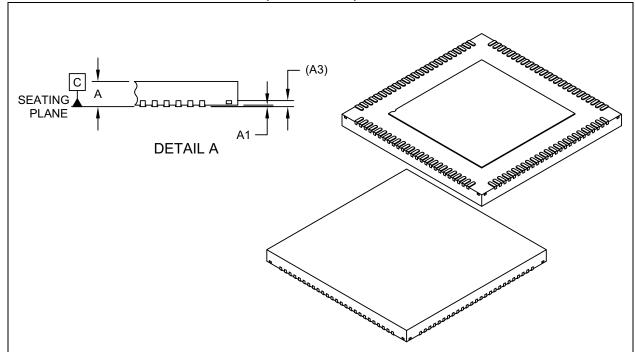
100-VQFN PACKAGE (DIMENSIONS)
